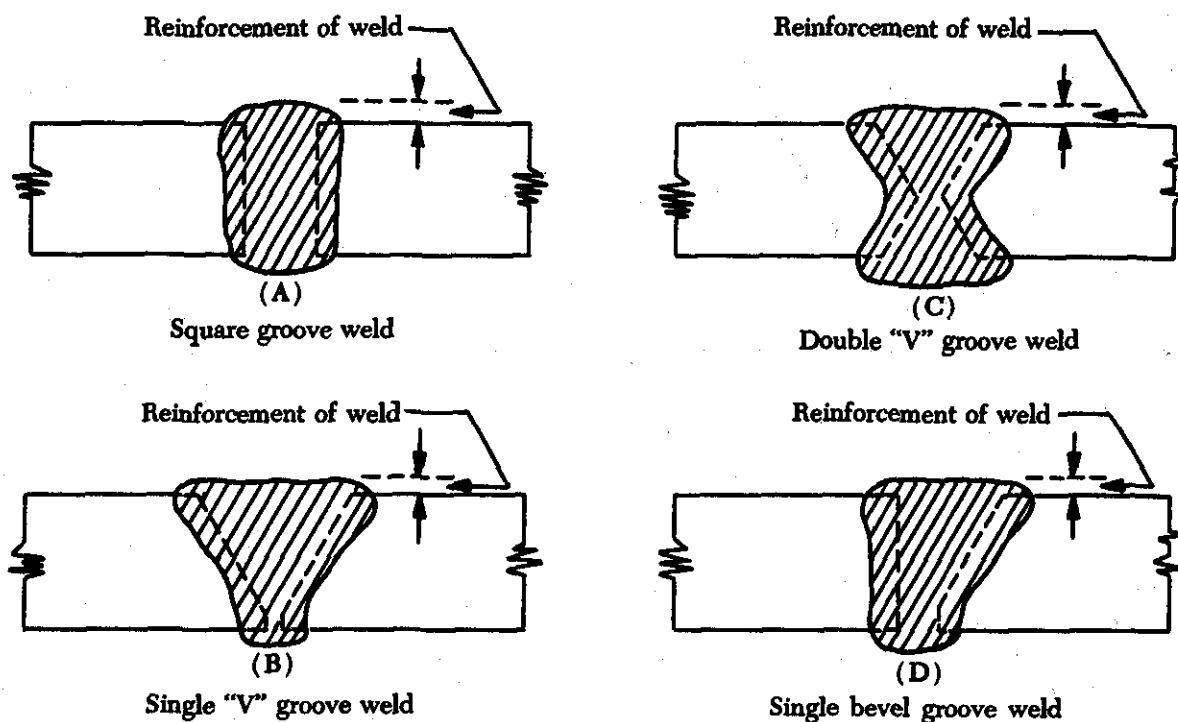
Groove welds on butt joints in the flat position.
